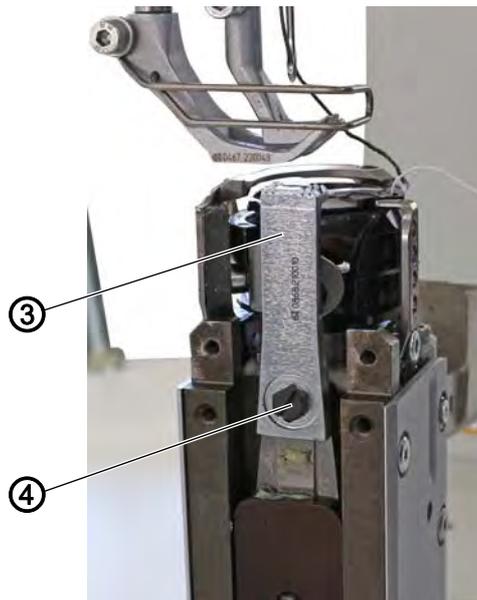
Assembling and disassembling the feed dog in a 2-needle machine (2)
